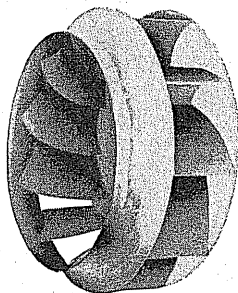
Impeller with double-curved blades manufactured by Sulzer.
